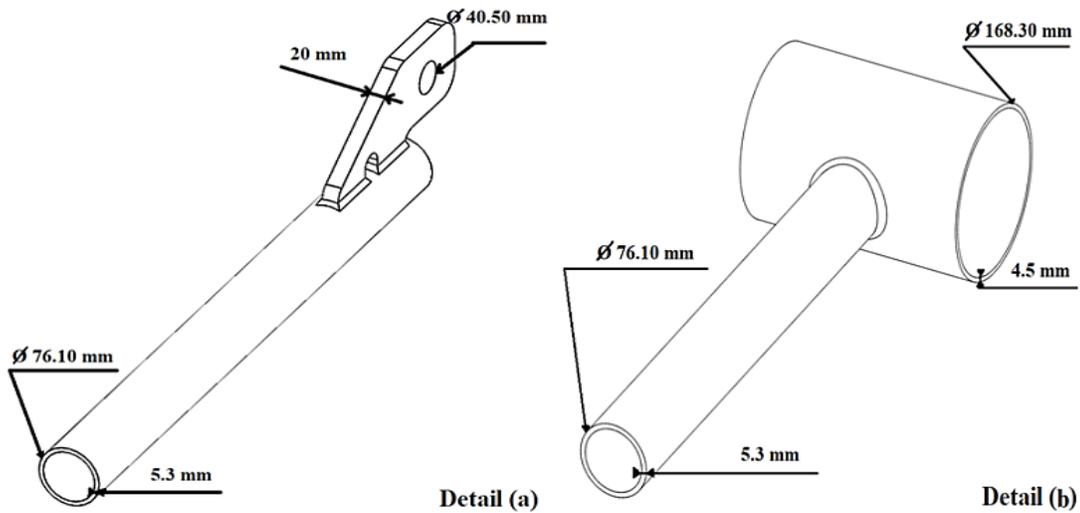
Main dimensions of the selected welded parts for fatigue assessment study.
